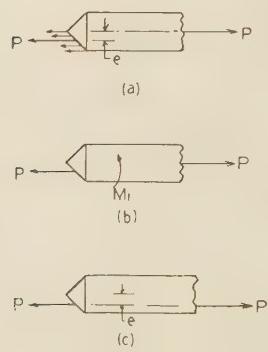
EQUILIBRIUM OF FORCES IN A TRANSVERSE FILLET WELD
